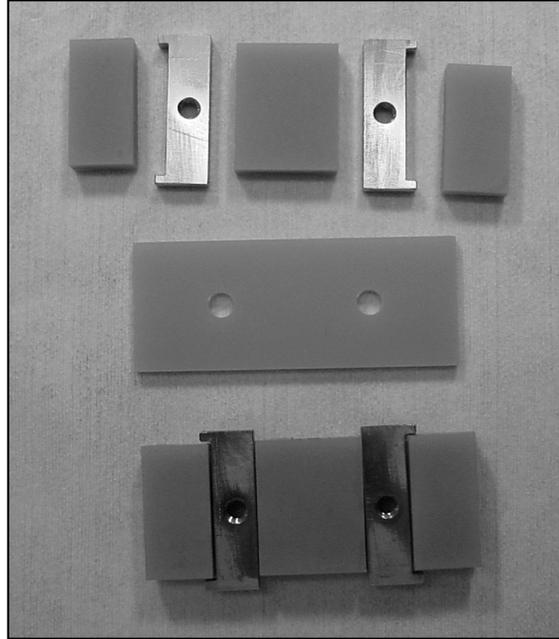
The assembled mounting and cooling foot is shown at the bottom of the figure, with the individual parts shown above.
